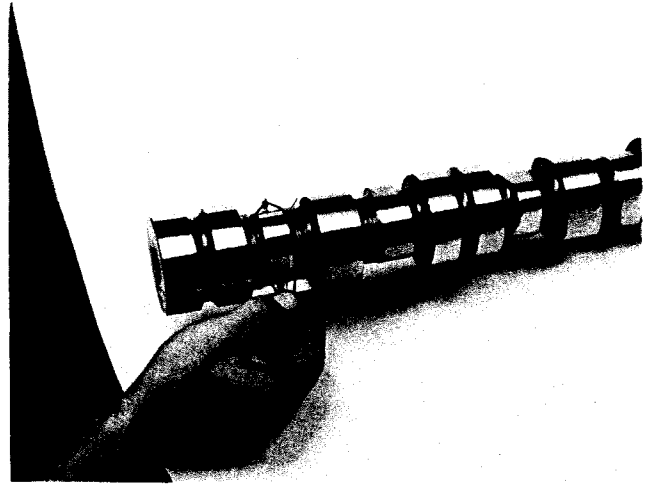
, (N114254). Installing camshaft pilot sleeve
